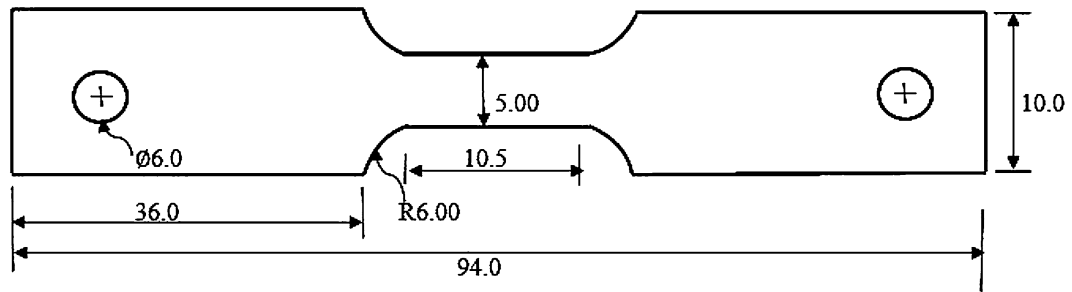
Fatigue testing specimen (all dimensions in mm).
